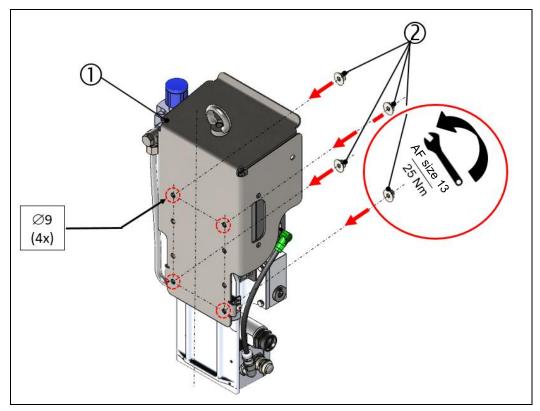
Installing VN2020 without bracket and with protective cover (rear view)
